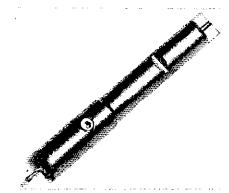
Tool used in isolated-pad construction. Set screw allows removal of the No. 60 center drill. The shank will fit either an ordinary hand drill or certain push-type screwdrivers.
